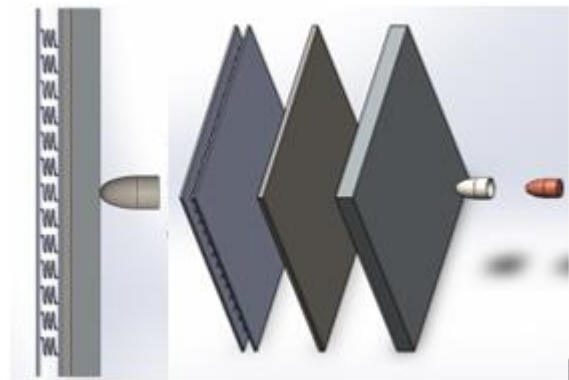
Geometry model of armour and bullet (Assembly & Exploded view)
